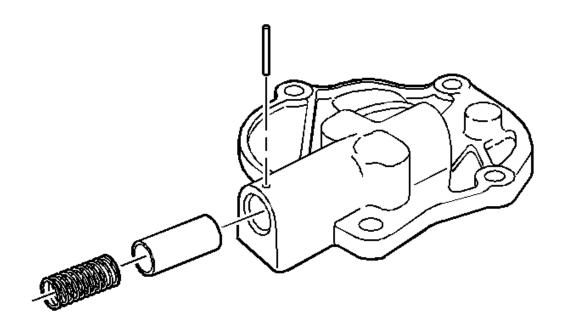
View Of Oil Pump Housing & Gears Courtesy of GENERAL MOTORS CORP.
